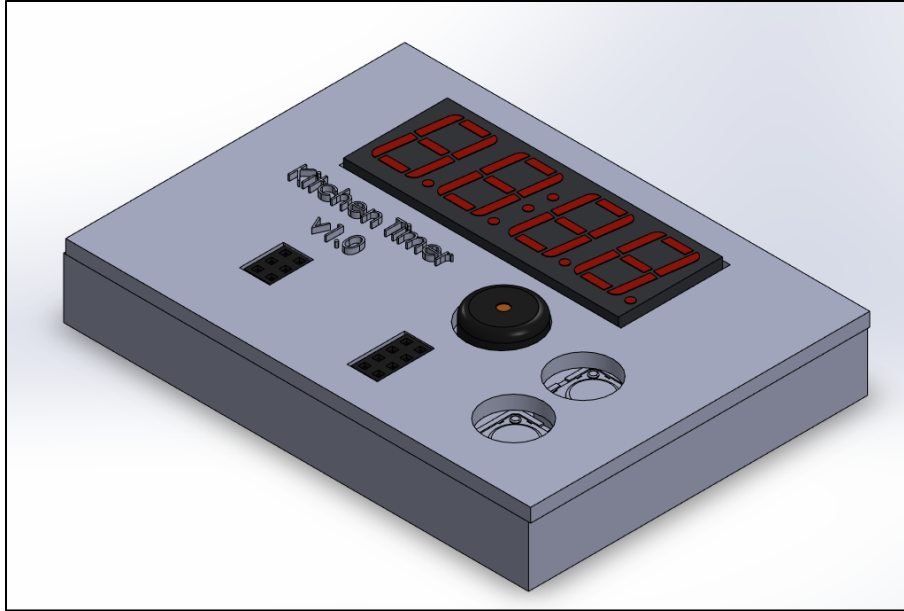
PCB and Enclosure Assembly 3D rendering in SolidWorks
